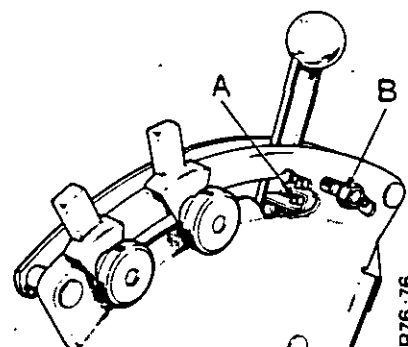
QUADRANT SPRING SETTING FOR TRACTORS WITHOUT CAB
